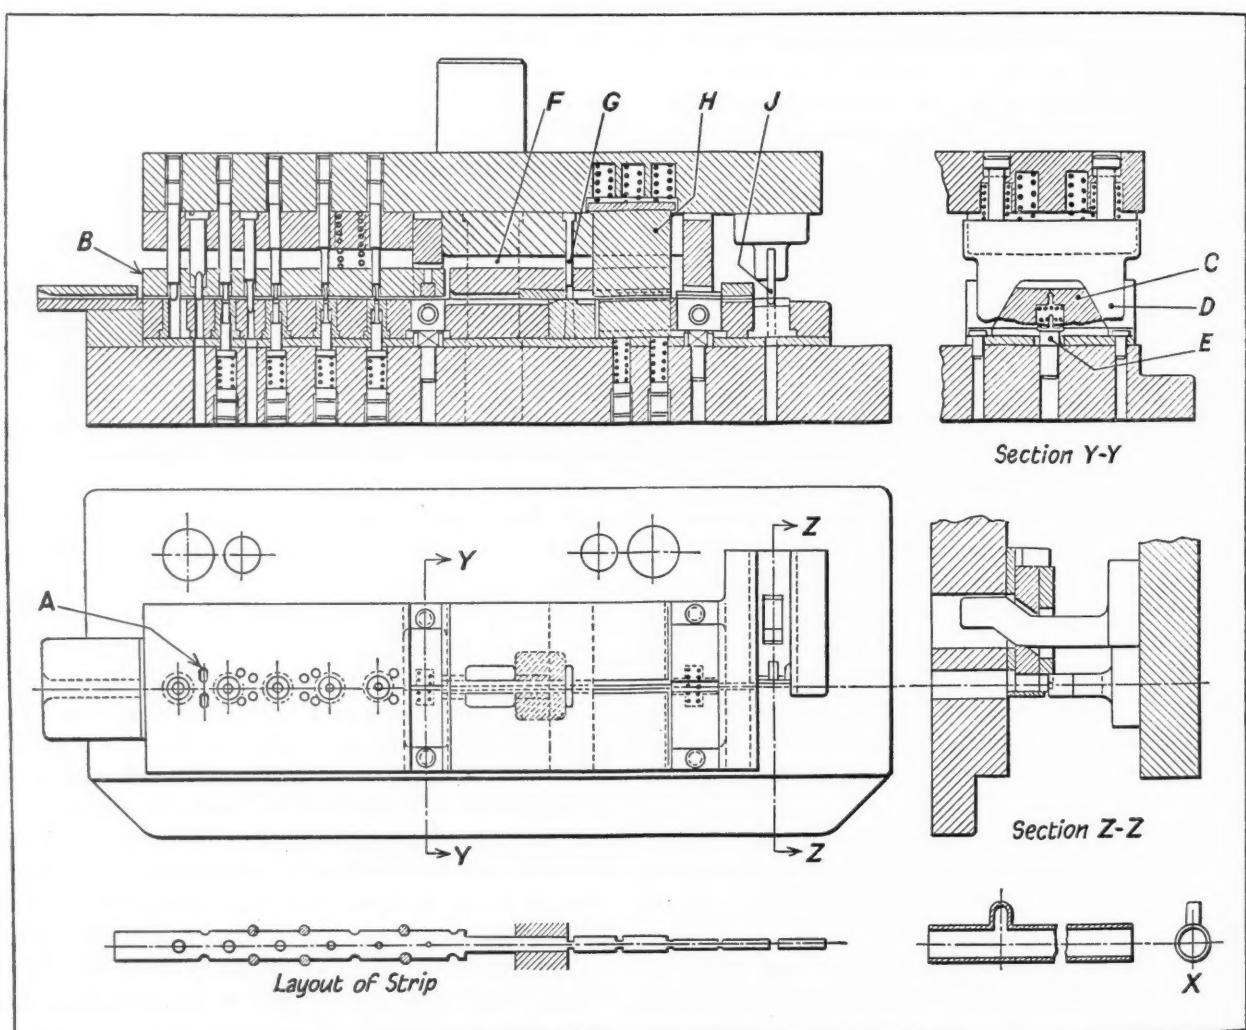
Design of twelve-station die used in forming tubular lead-holders for mechanical pencils from 3/8-inch brass ribbon stock
